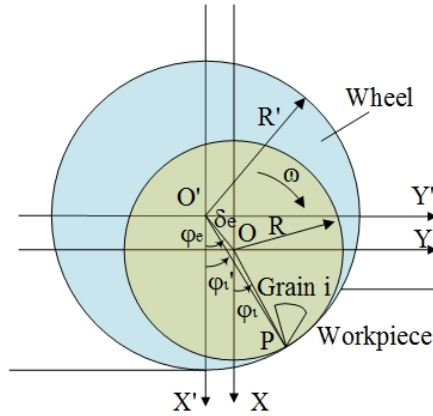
Eccentrically rotational model of grinding wheel ($\delta_e = \overline{OO'}$, O' -spindle axis, O -actual wheel axis)
